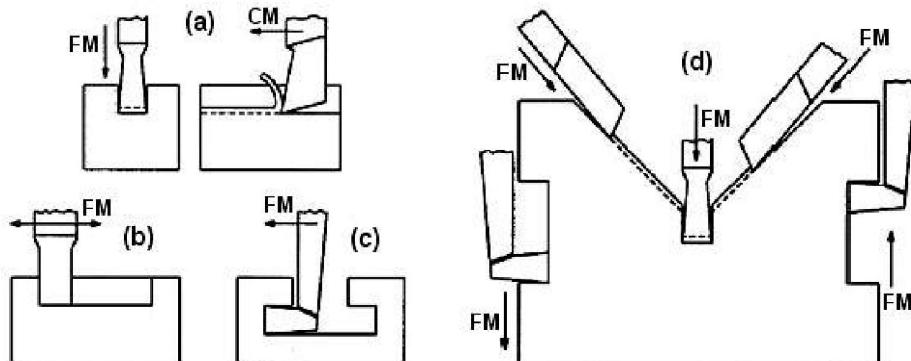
Machining (a) Slot (b) Pocket (c) T-slot and (d) V-block in a shaper
